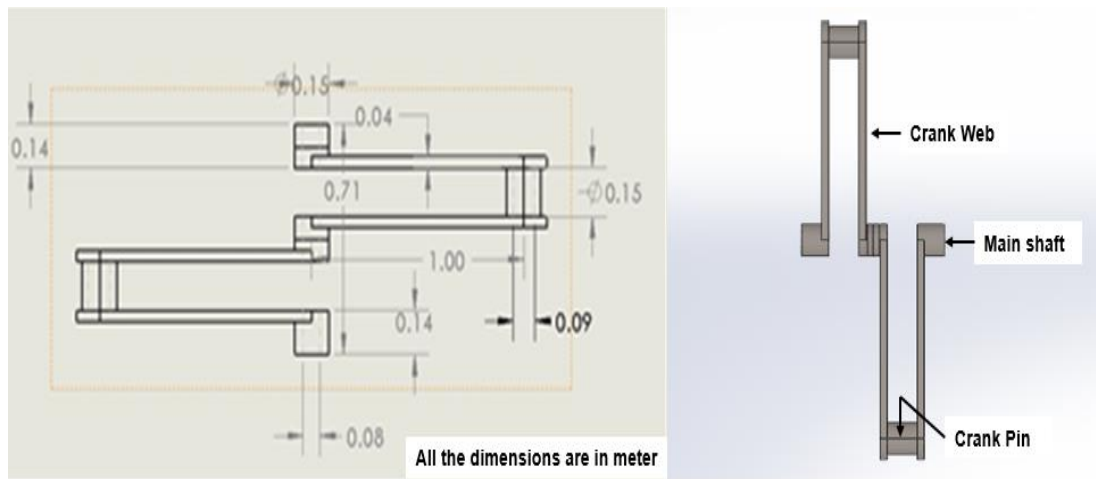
Drawing and SolidWorks designed crankshaft with specified dimensions.
